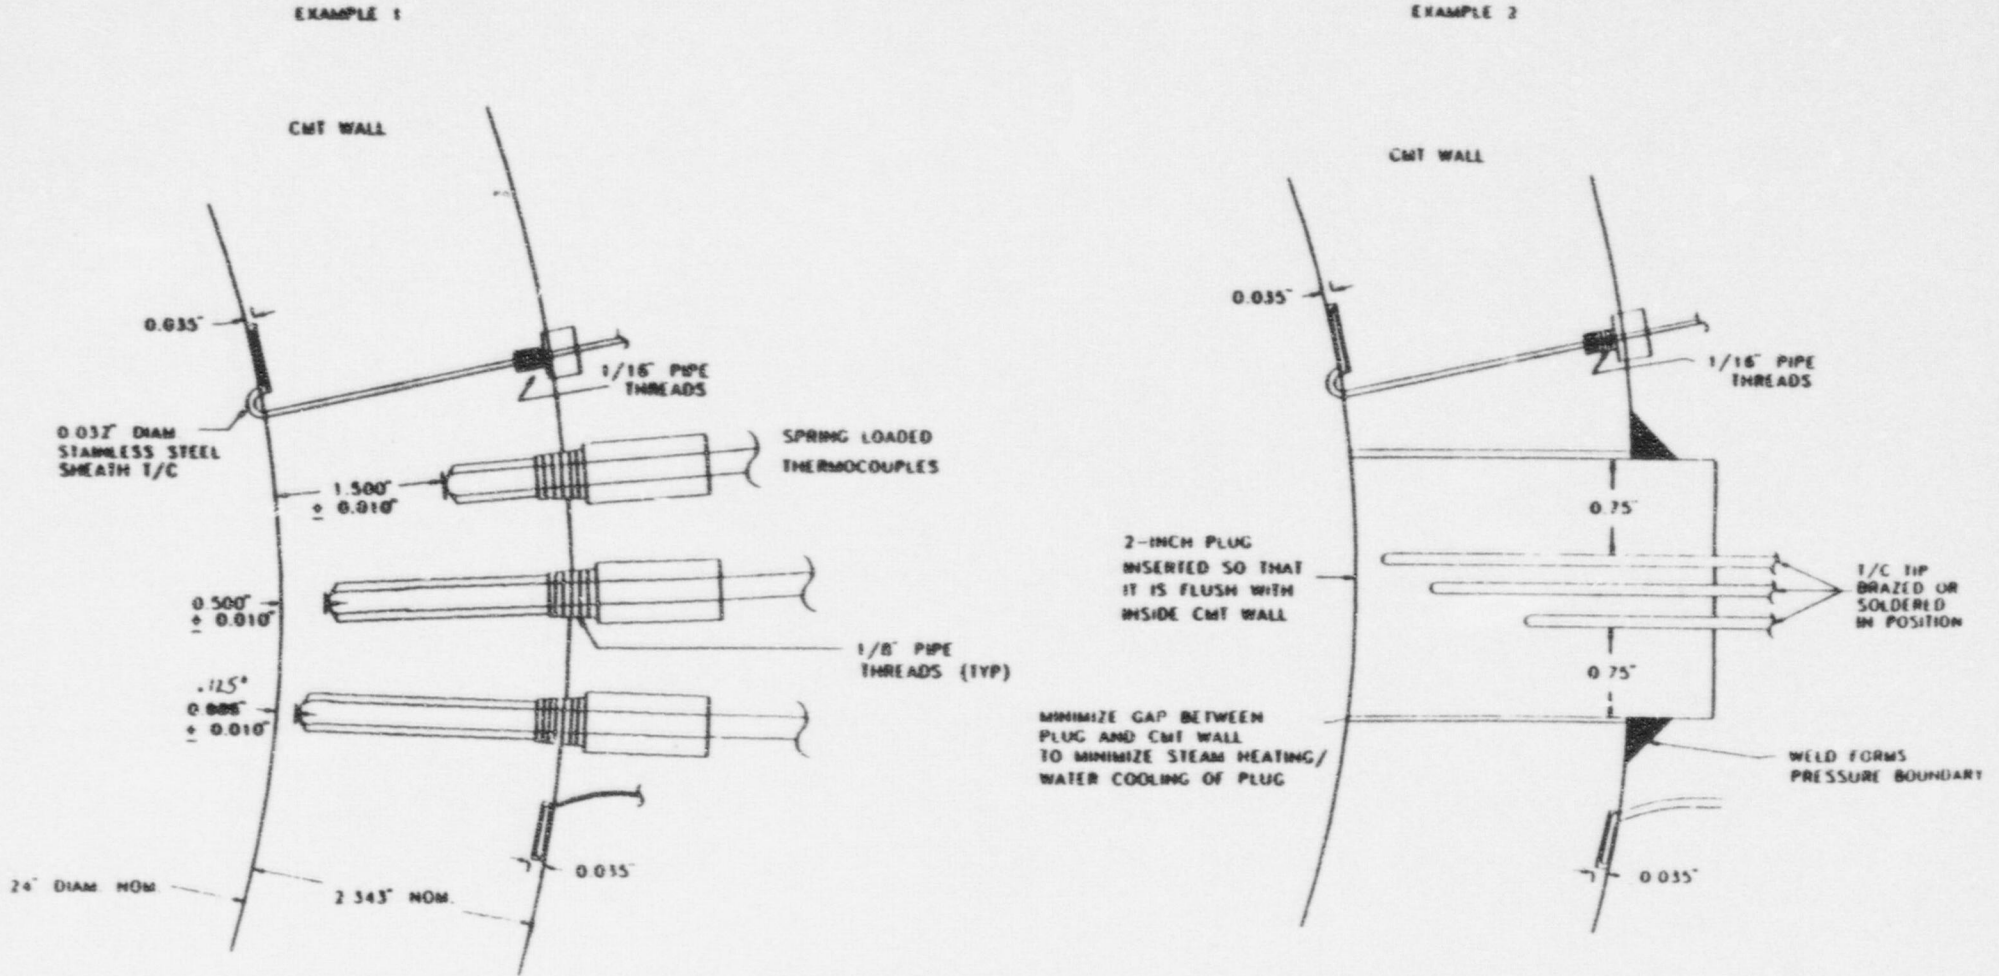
AP600 Core Makeup Tank Test - CMT Wall Thermocouple Installations (Examples Only)
